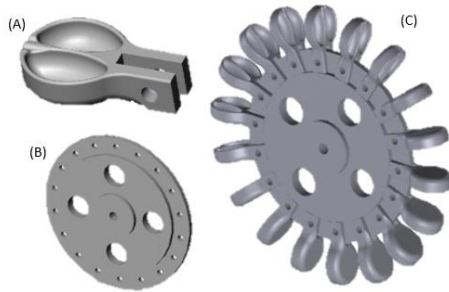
(A) Bucket Design, (B) Runner Design, (C) Pelton Turbine Design
